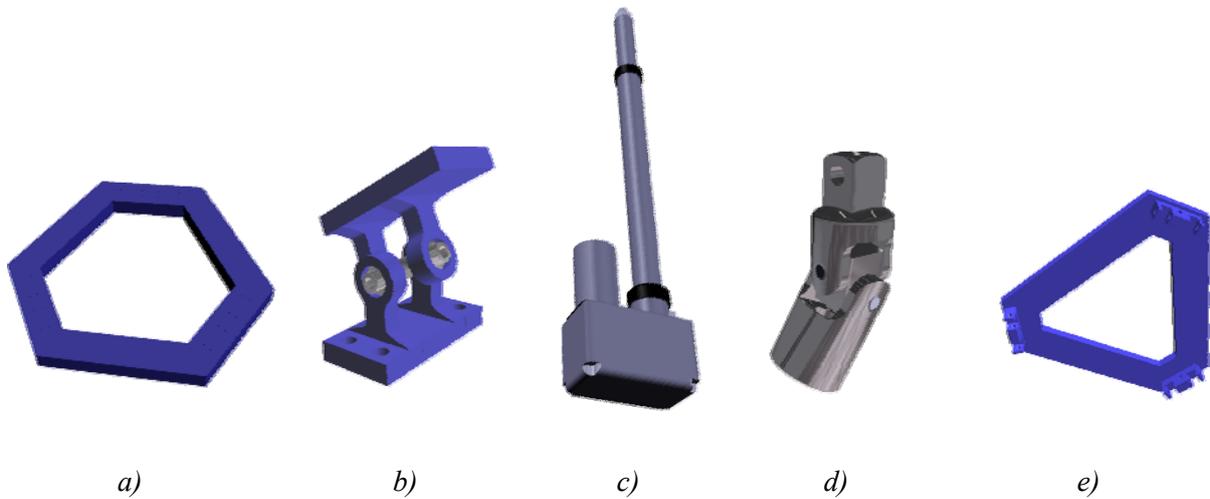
Parts of training hexapod: a) fixed platform (base), b) lower Cardan joint, c) leg with drive, d) upper Cardan joint, e) moving platform of hexapod
